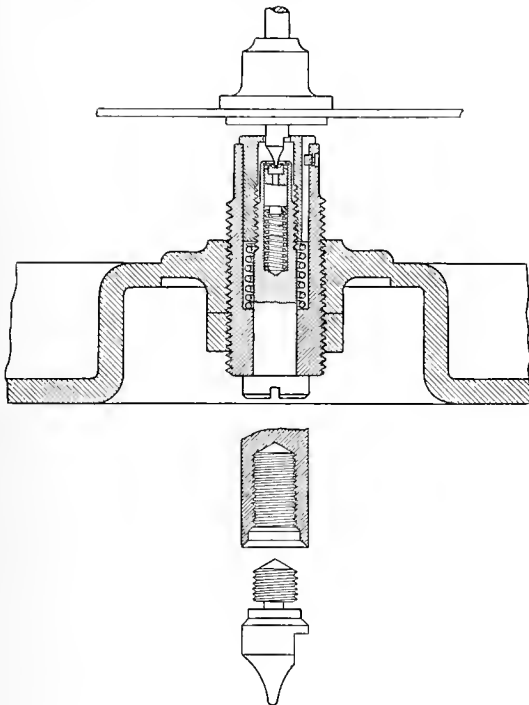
Pivot and Jewel Type of Lower Bearing.
